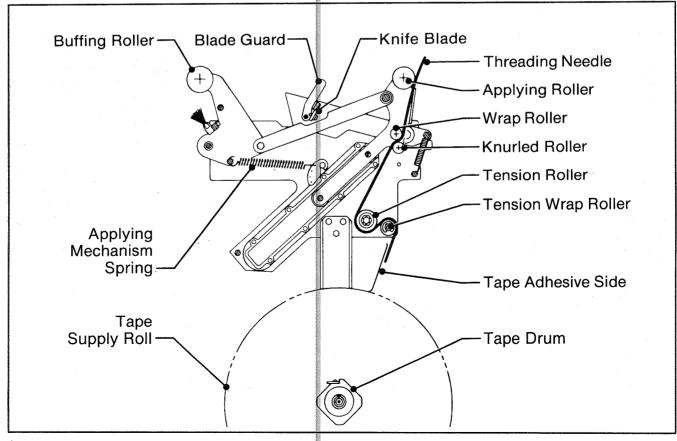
A - Tape Threading Diagram - Bottom Taping Head - Left Side View
